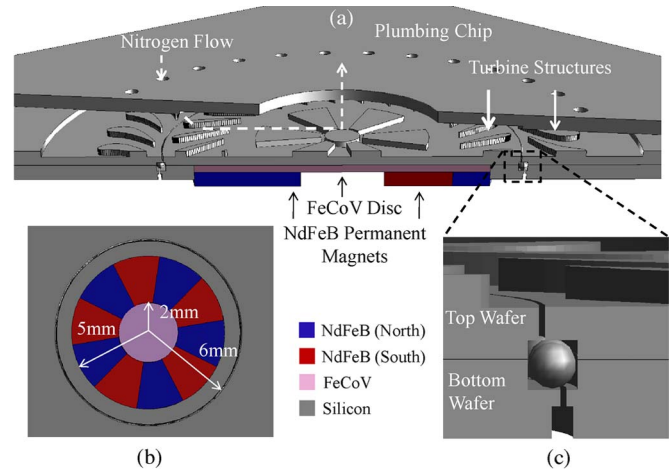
Three-dimensional schematic views of the rotor showing (a) general structure and actuation, (b) permanent magnets on the bottom, and (c) encapsulated microball bearings.
